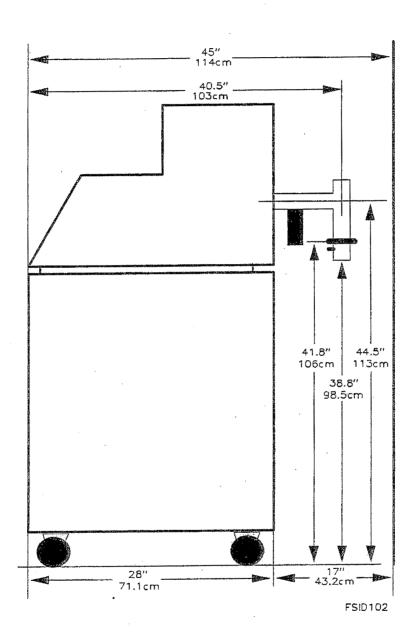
SYSTEM DIMENSIONAL DRAWING, REAR
